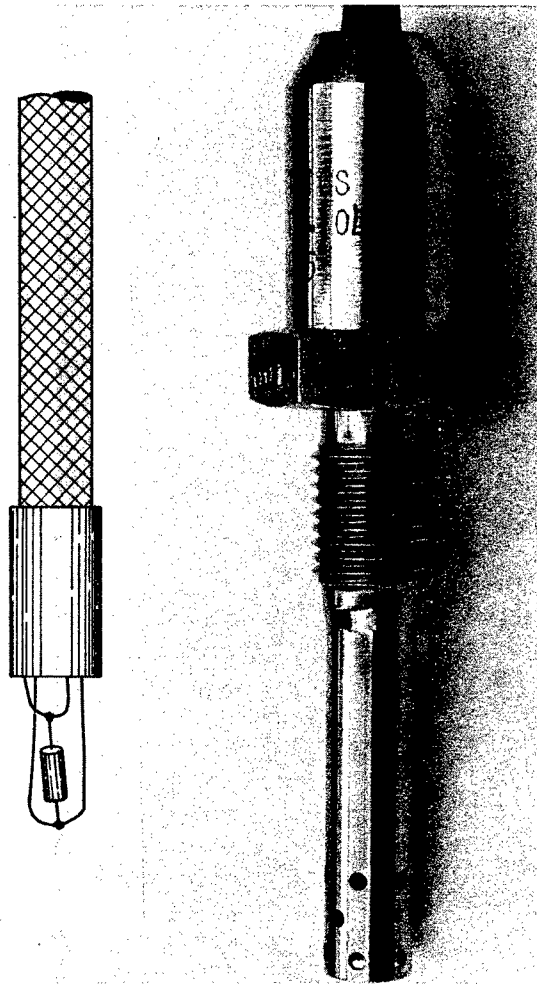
Insert assembly and completed assembly of wide-range temperature probe developed for MSFC.
